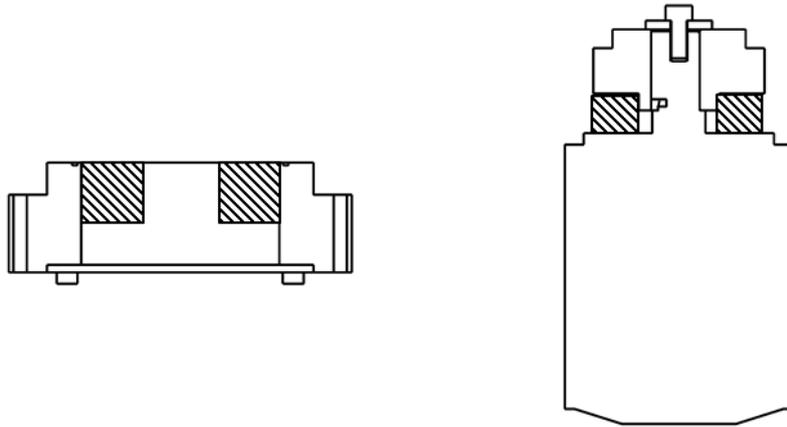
Fitting the Axis-2 Reduction Gear
